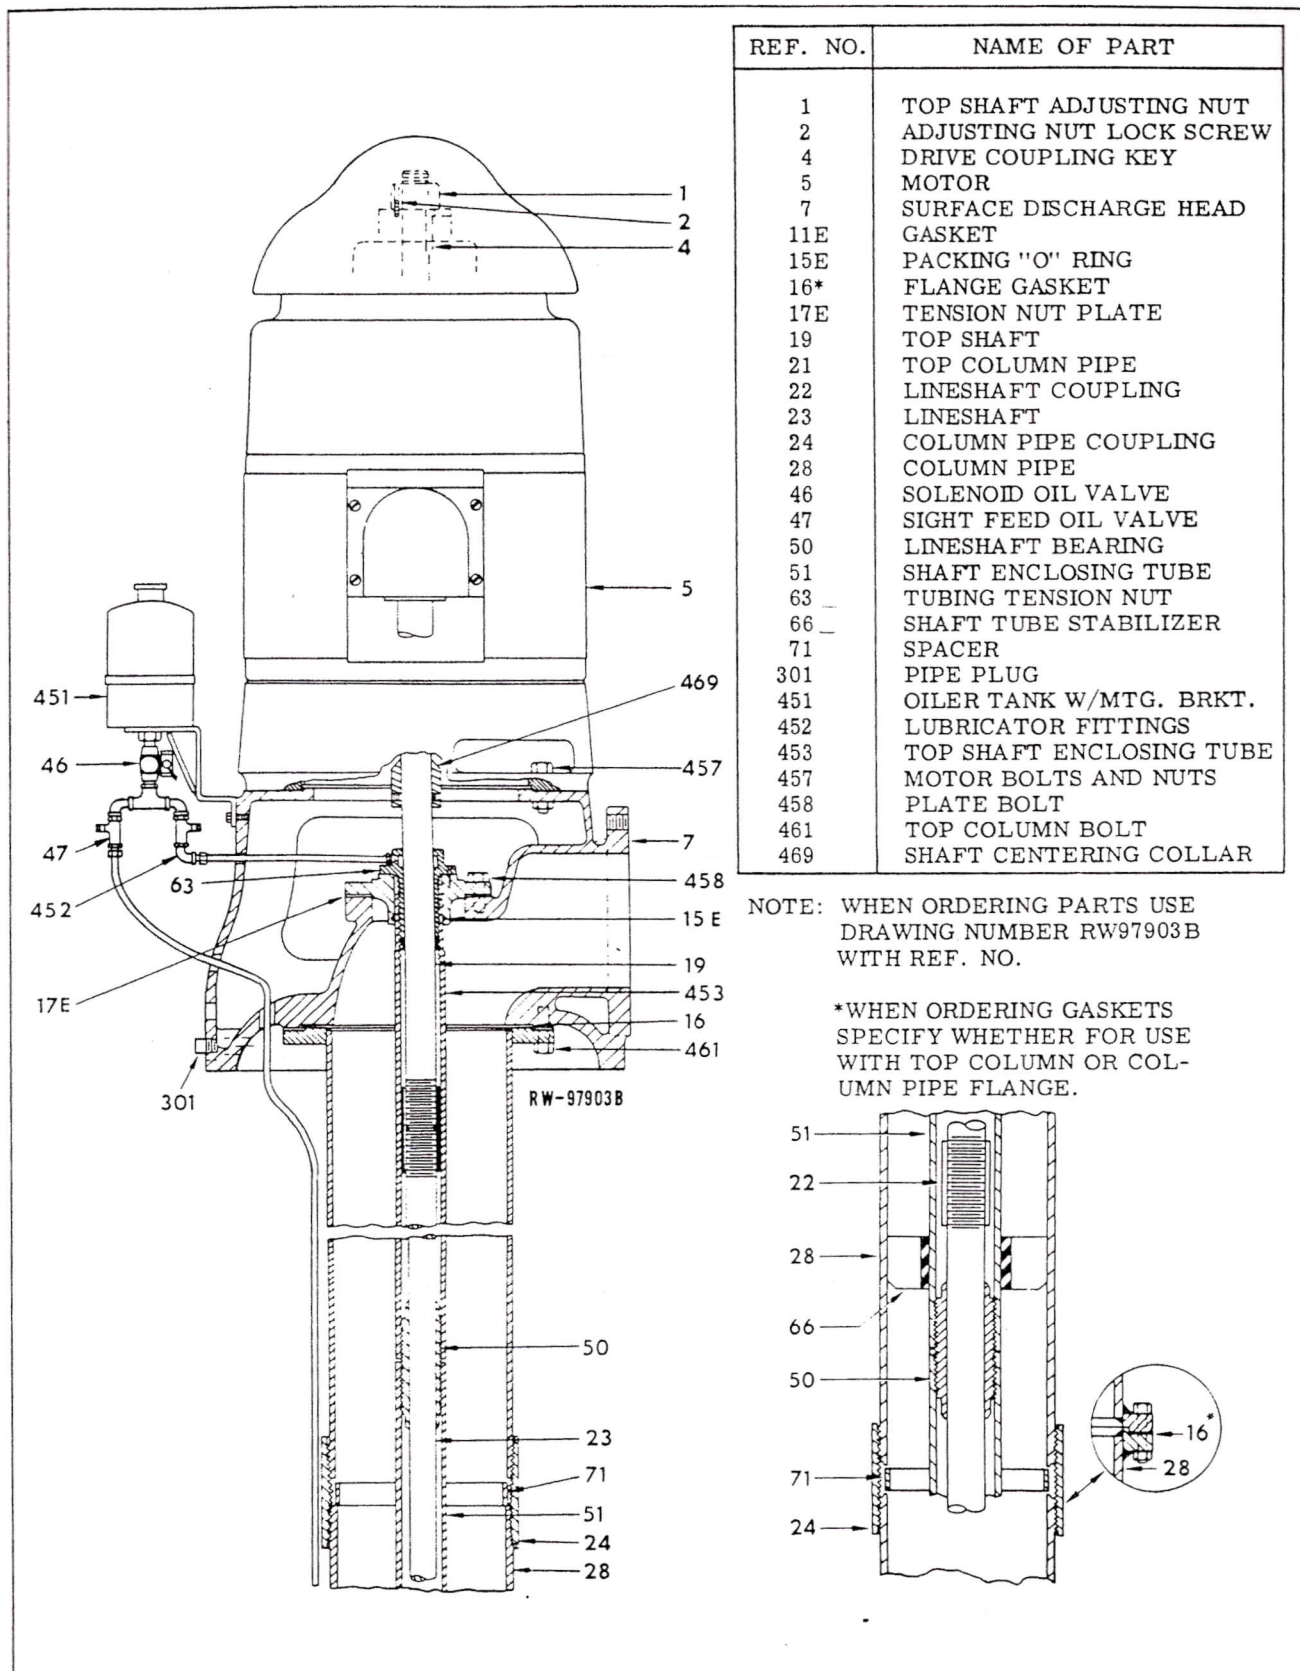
Enclosed Lineshaft Pump and List of Parts
